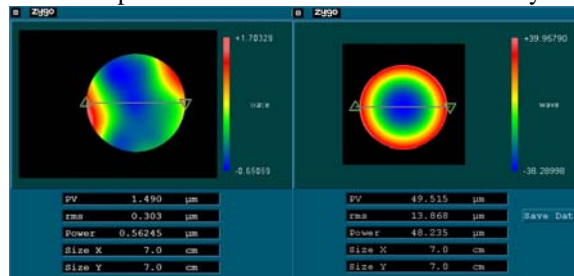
Figure error prior (1.4 μm PV) to and post (49.5 μm PV) milling on a 3" sample representing the inscribed circle on a lightweighted optic. Notice the convex bow indicative of the compressive stress on the damage layer. damage introduced in the previous lapping step [2]. This was considered the baseline 'stress-free' state of the disks. One surface was used for metrology while the other was milled using a process proprietary to a SiC manufacturer. A peak deflection of almost 50μm was observed after the milling operation illustrating the sensitivity of figure error to sub-surface damage.
